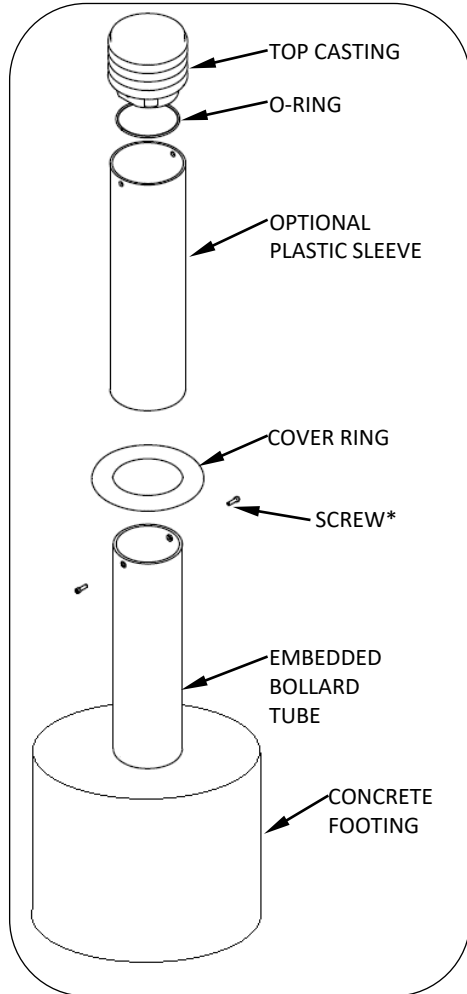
EMBEDDED BOLLARD ASSEMBLY
